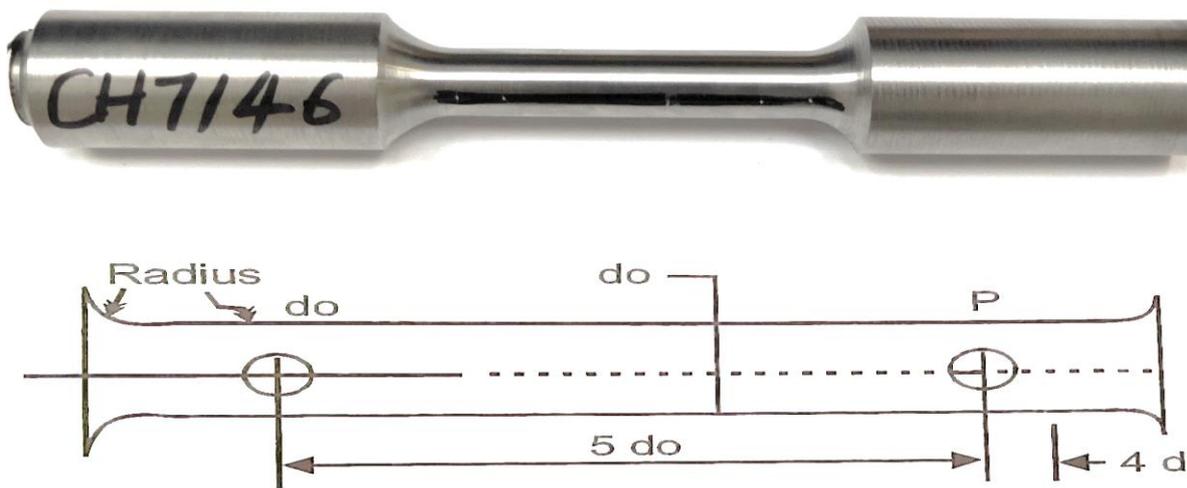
Tensile Test all Weld Metal
